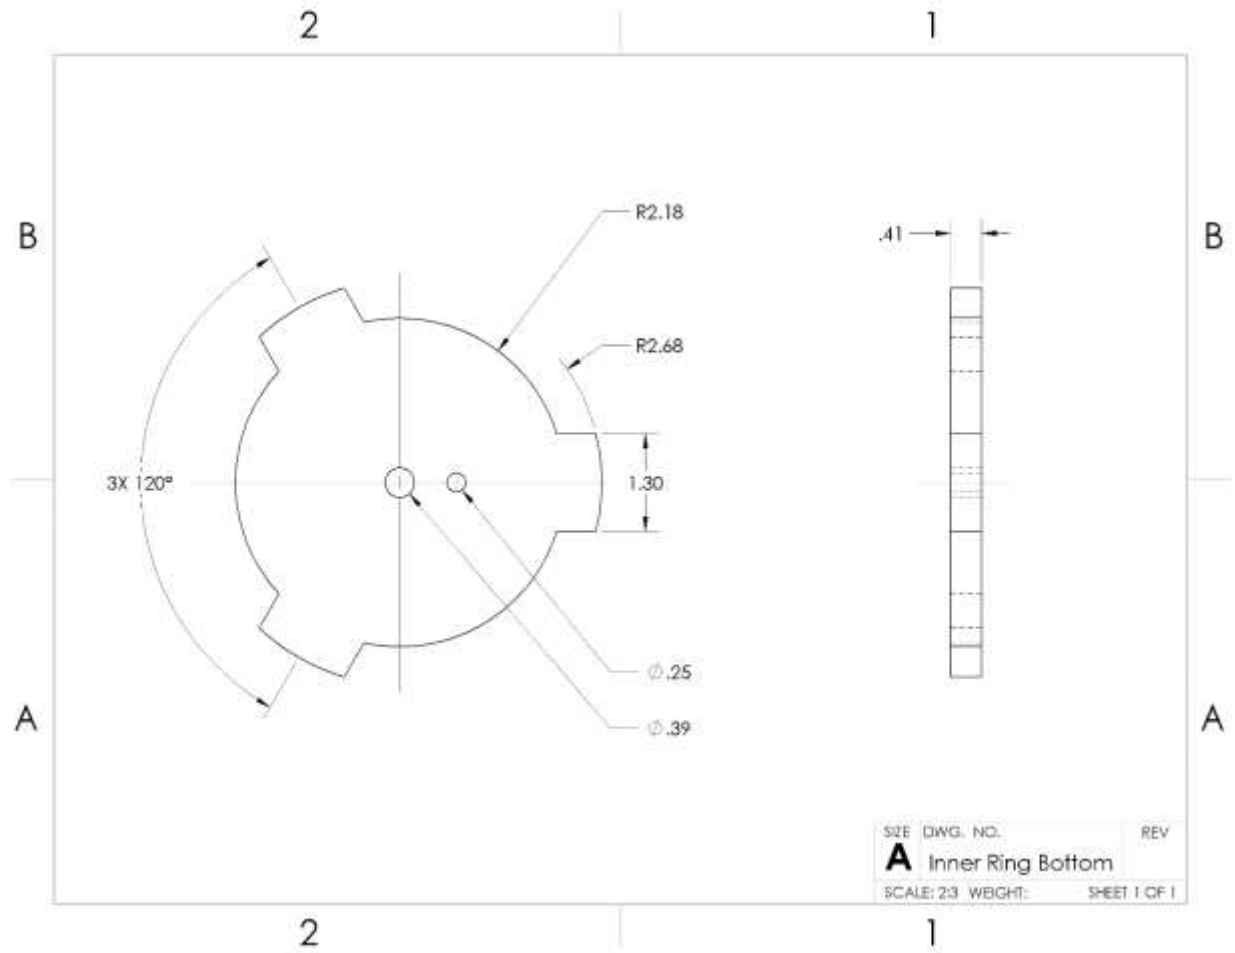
Locking Mechanism Inner Ring Bottom Drawing
